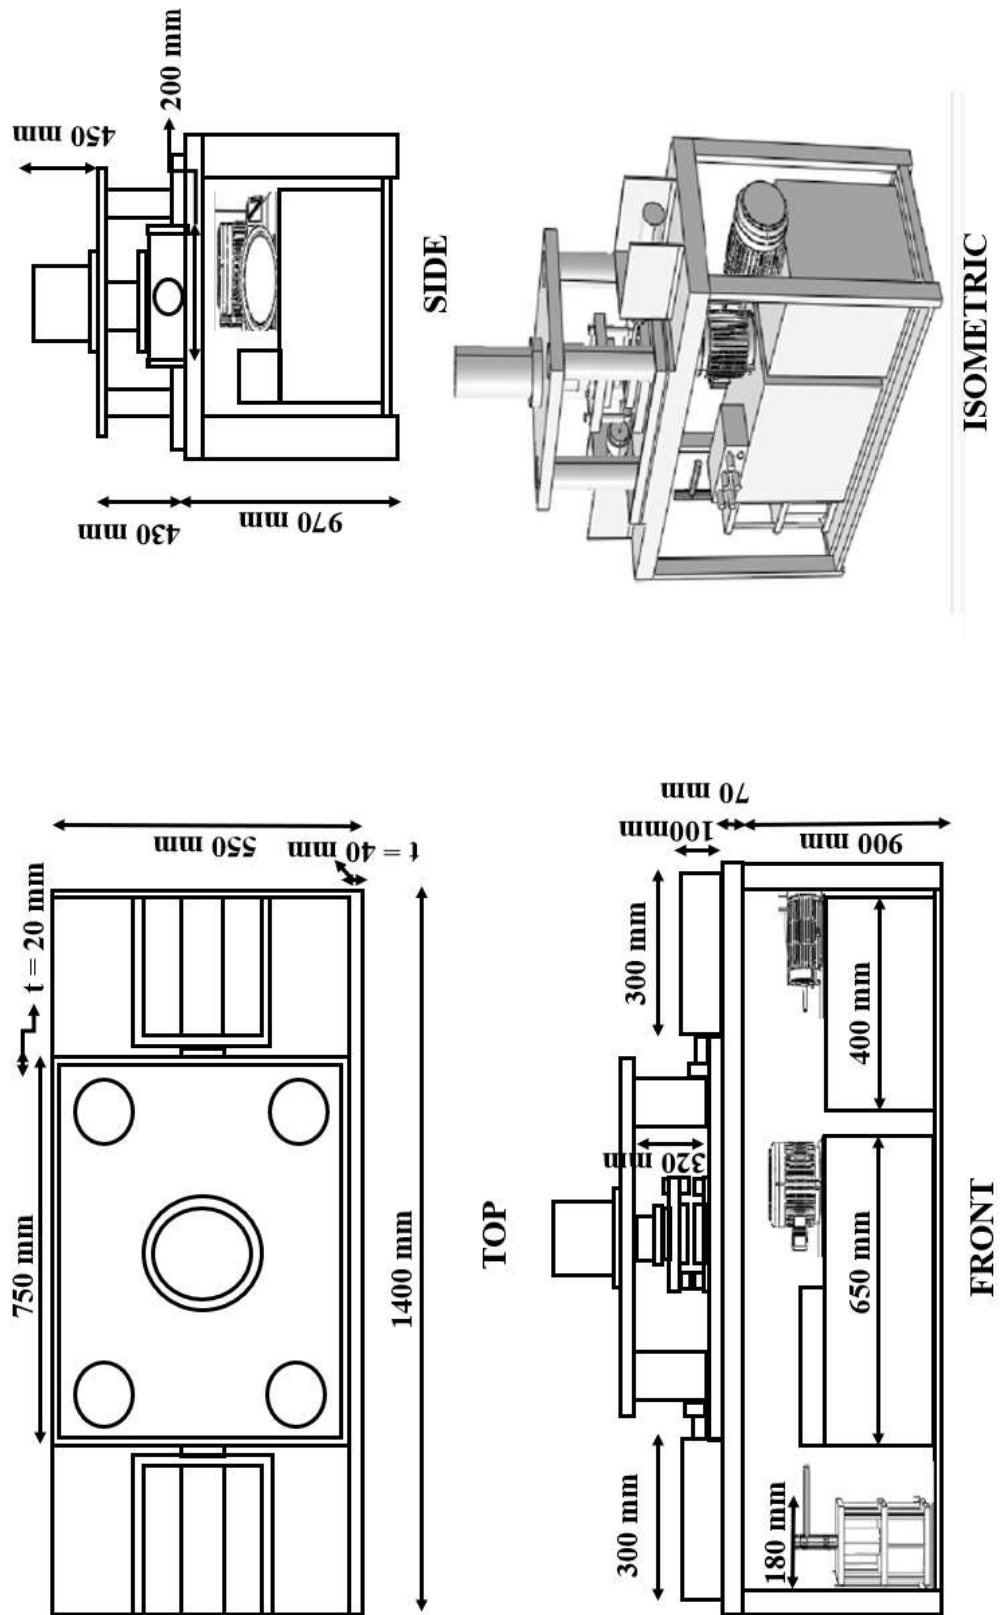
Complete Tube hydroforming assembly set-up orthographic design
